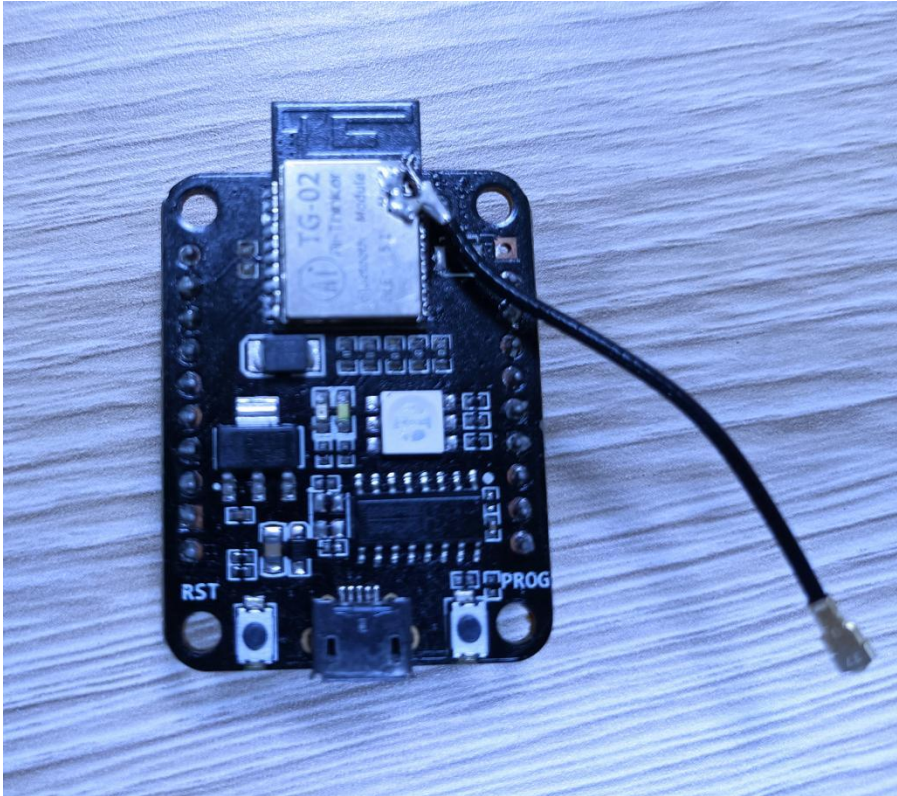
A schematic diagram of the user welding the module to the motherboard
